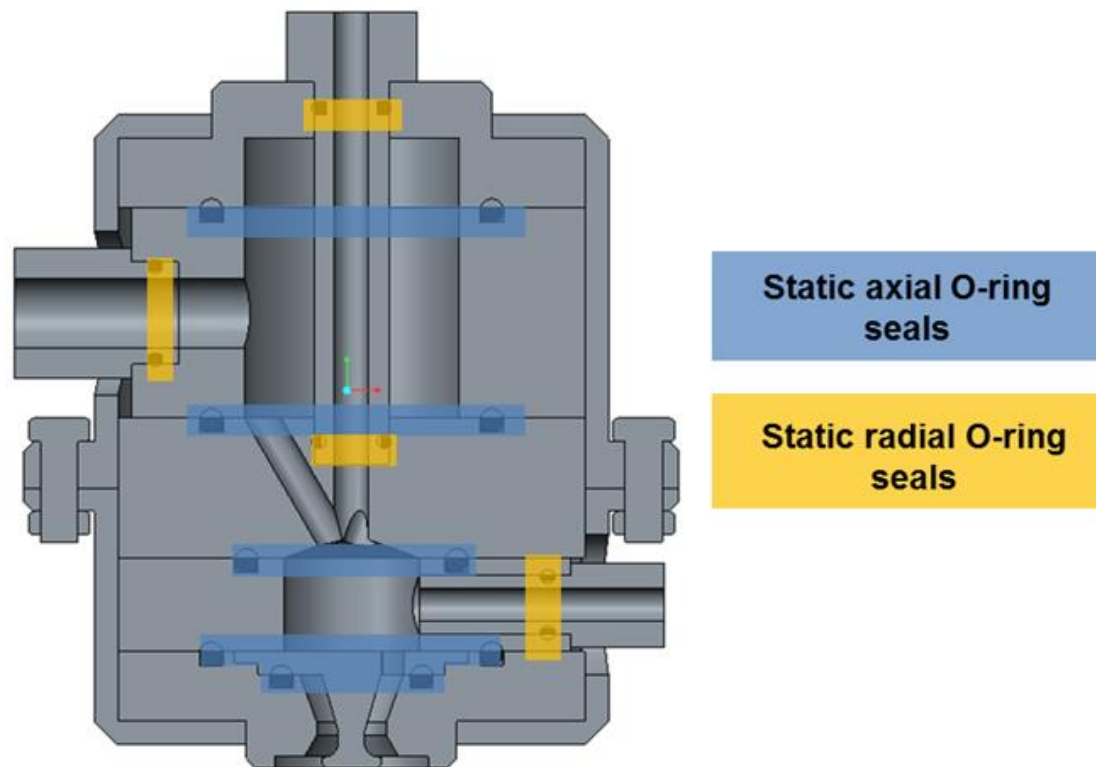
Selections of static axial seals and radial seals in the nozzle design
